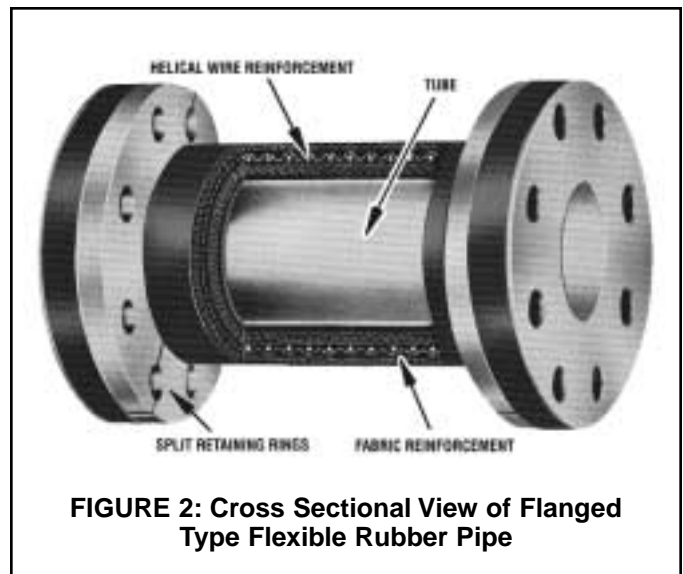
Cross Sectional View of Flanged Type Flexible Rubber Pipe
